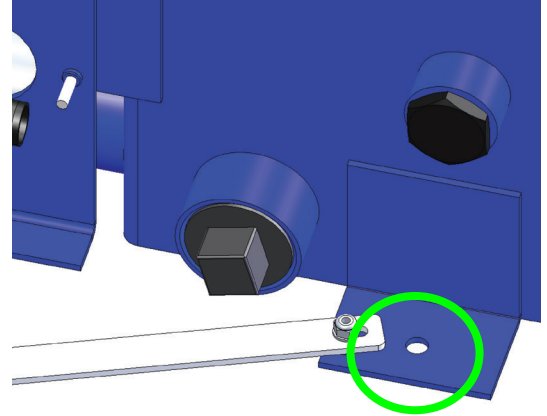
Mark Hole Location for Recovery Tank - Front of Tank
